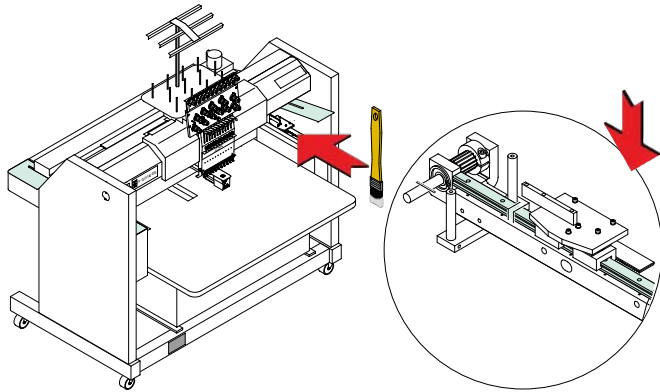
Pantograph drive (front to back) (Tiefe) Illustration: front cover raised (machine shown without control)
